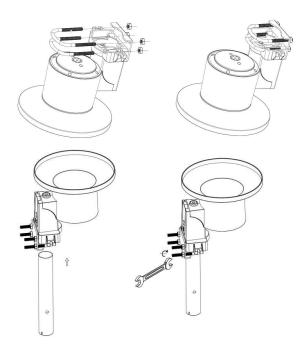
Rain gauge sensor mounting with u-bolts installation diagram
